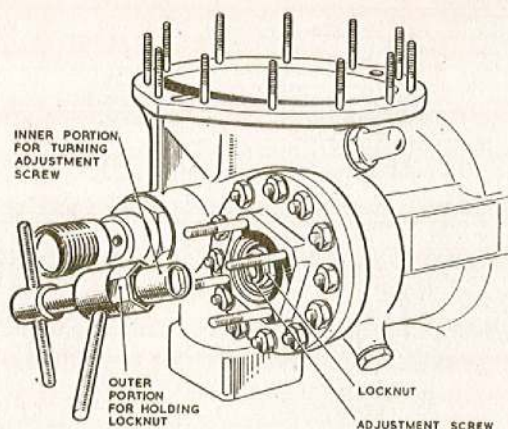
Adjustment of minimum flow stop for control piston, using tool T.174683
